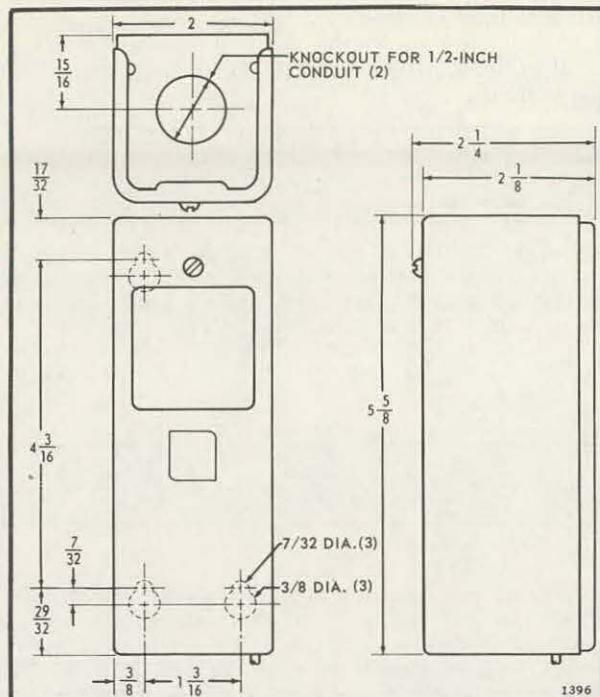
DIMENSIONS (IN INCHES) OF T675 AND T678 CONTROLLERS.
